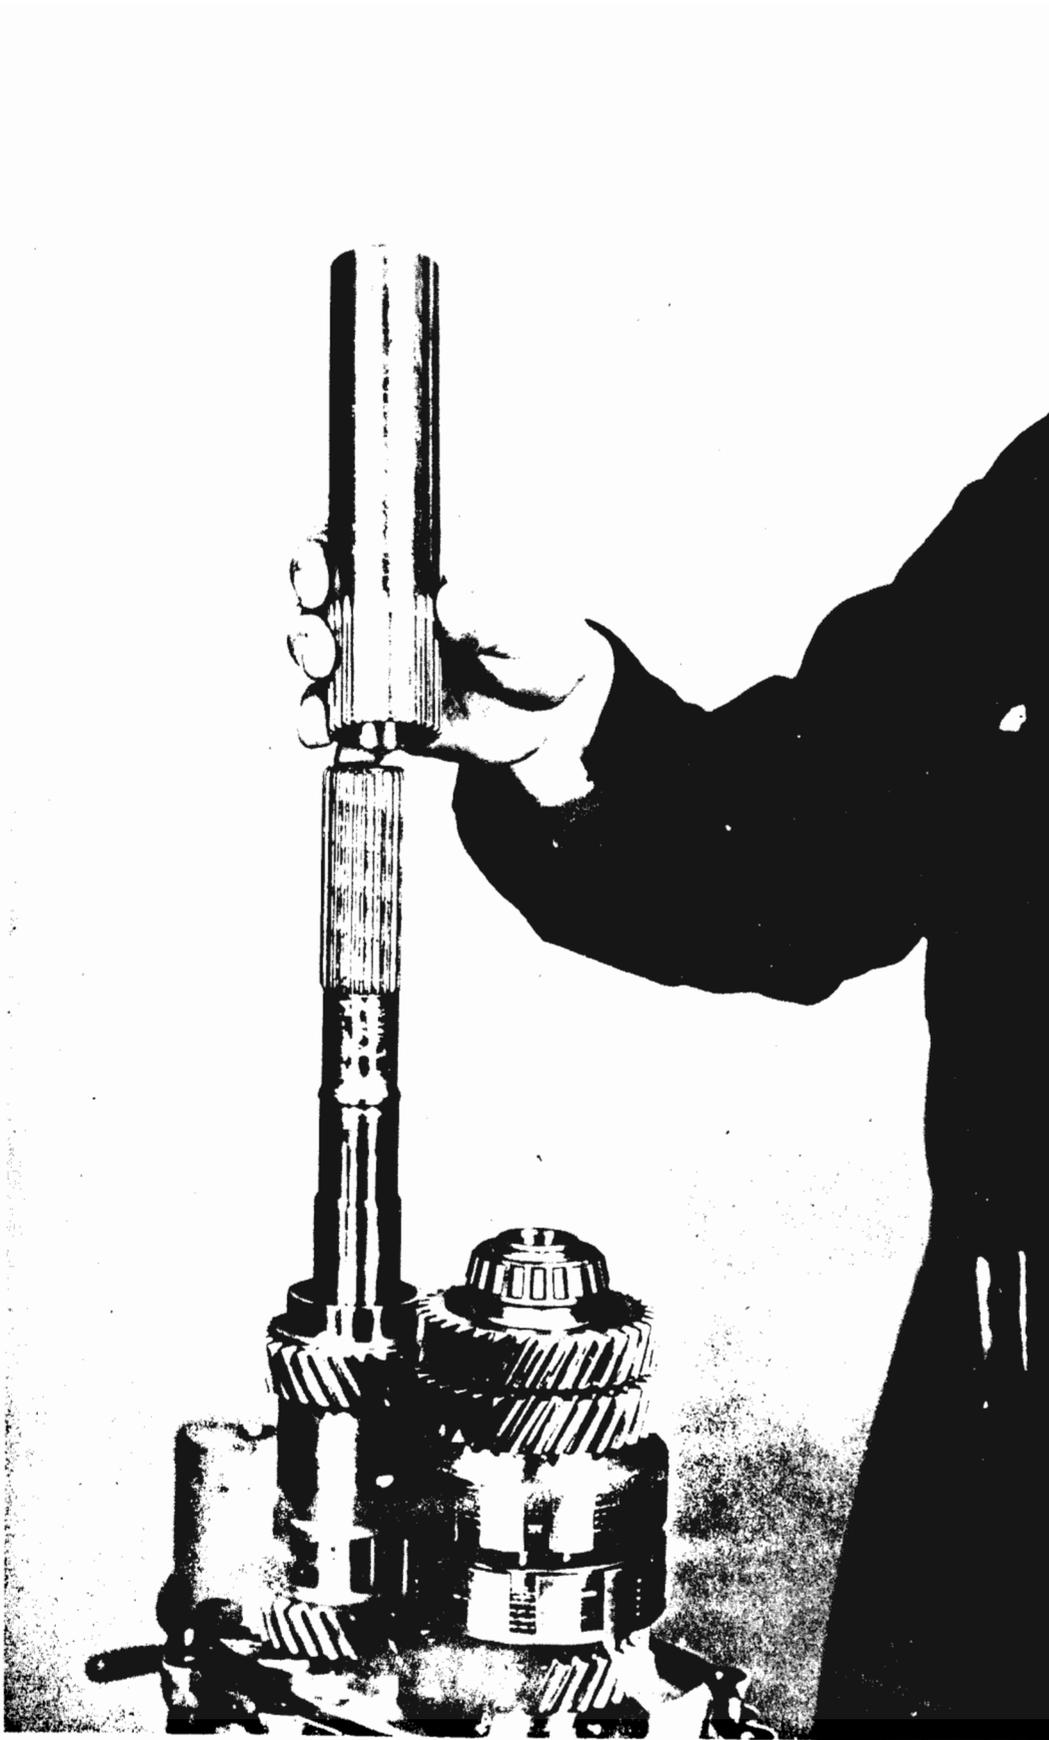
CONNECTING SLEEVE REMOVAL.
